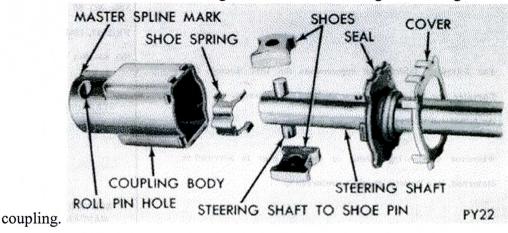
STEERING SHAFT COUPLING DISASSEMBLED
